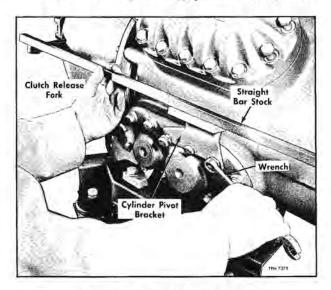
Checking Air Cylinder Mounting Bracket Alignment
